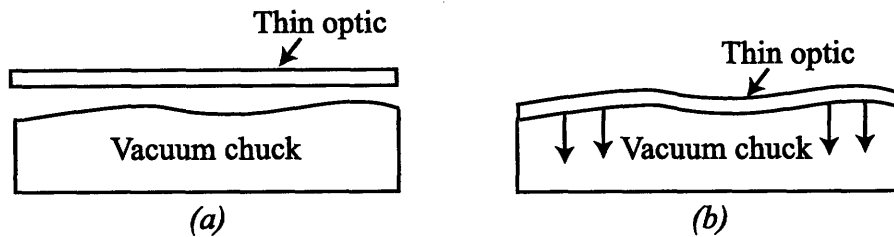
(a) A vacuum chuck with surface warp. (b) Once the thin sheet is held against the chuck by vacuum, the chuck warp is imposed on the sheet.
